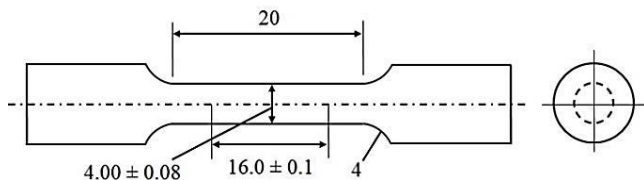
Tensile test specimen according to ASTM E6 (dimensions in mm)
